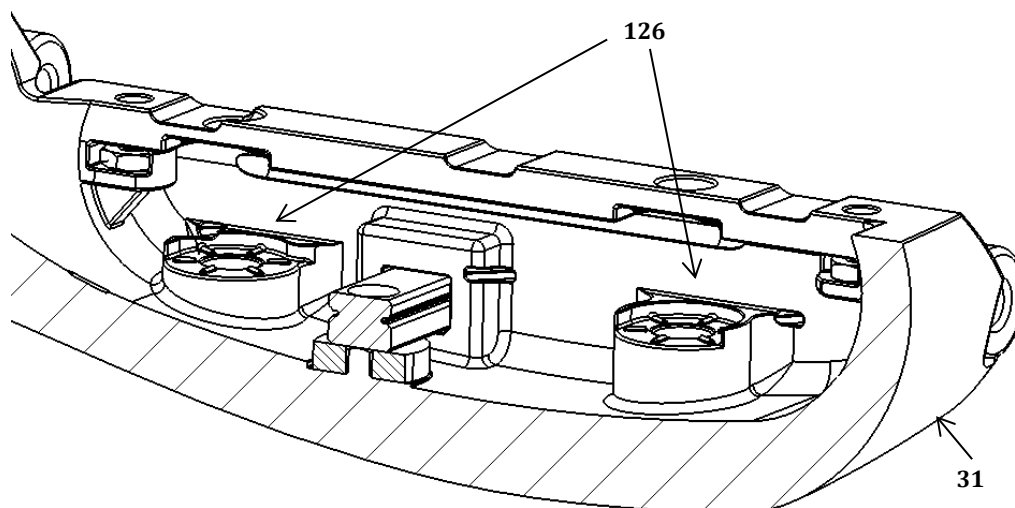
Perspective section view of the routing-bearing and linear-bearing supports.
